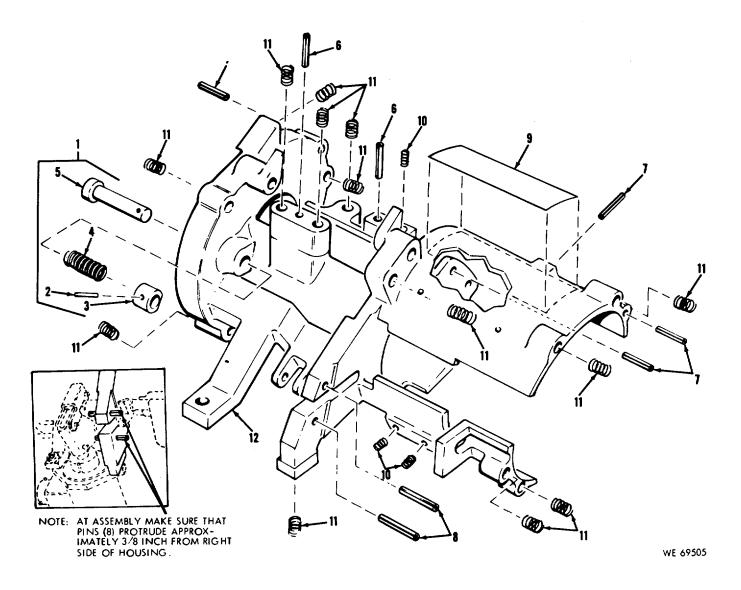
Delinking feeder MAU/56-A-exploded view (sheet 2 of 2)
